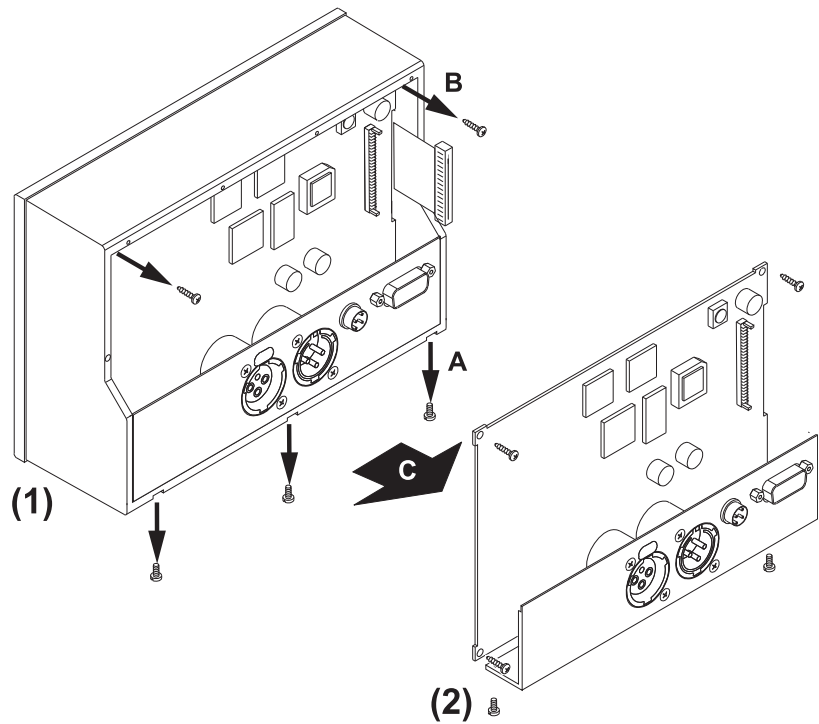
Unscrew and removal of connector panel and main pcb
